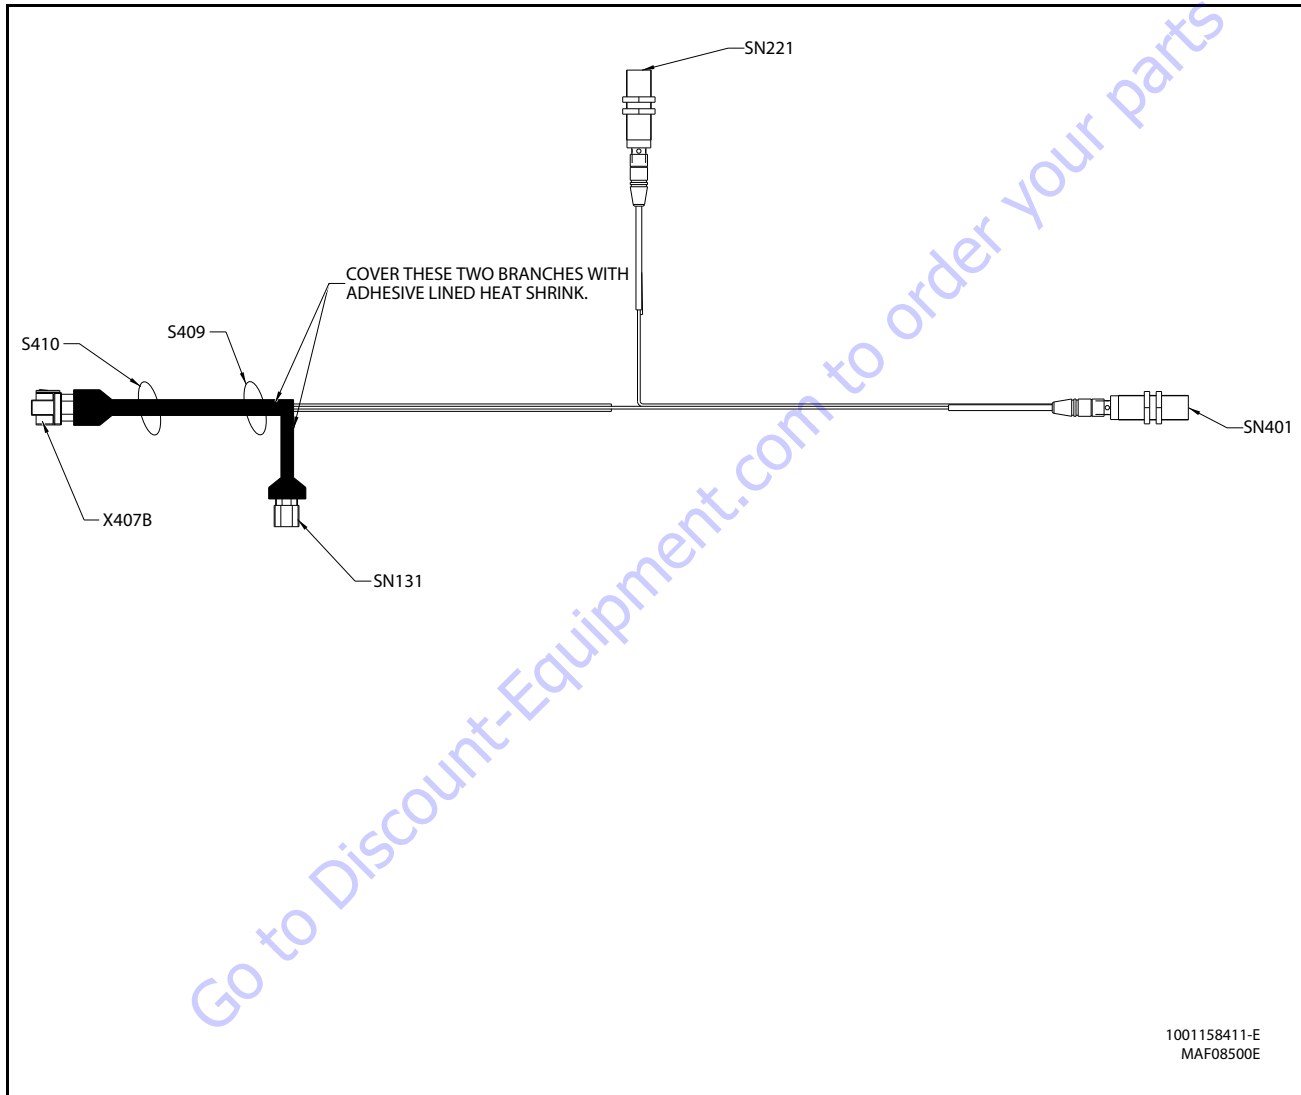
Base Boom Harness (Prior to SN 0300224828) - Sheet 1 of 2
